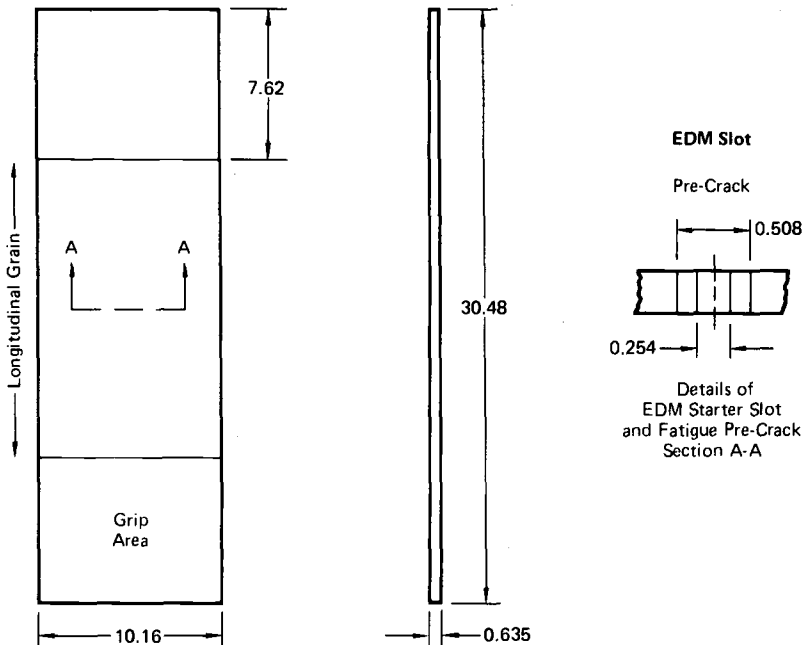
Center-cracked panel specimen (dimensions in centimetres).
